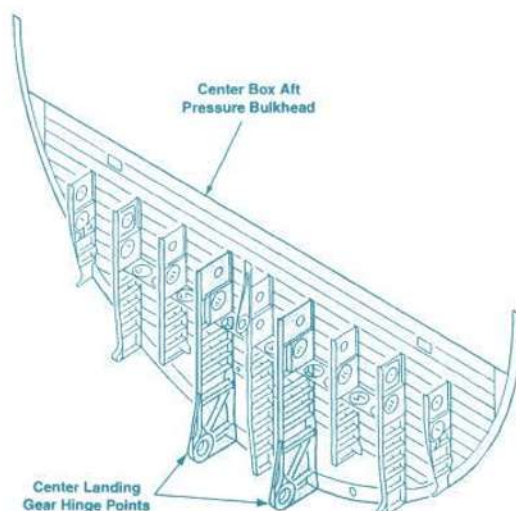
Example of Fuselage Landing Gear Attachment (Airbus A340-200)
